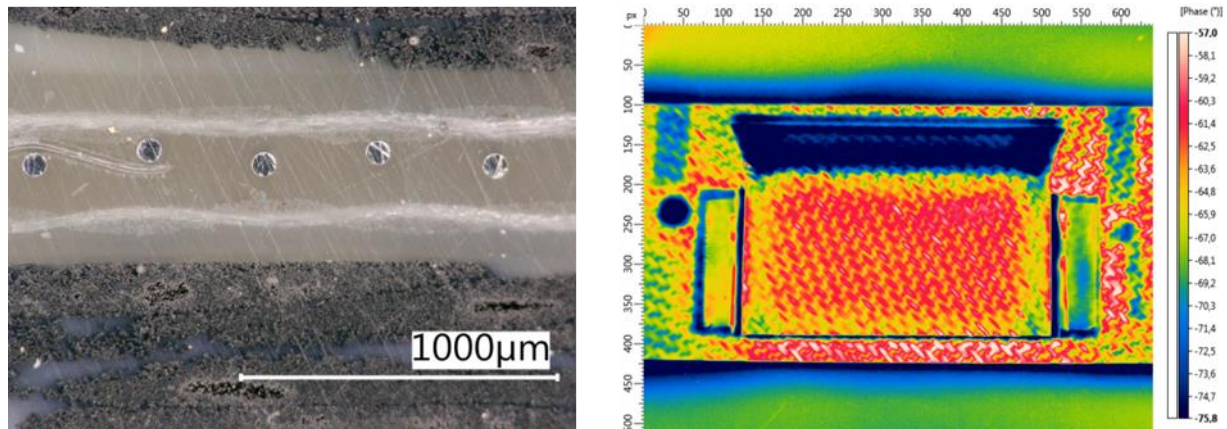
Microsection of the welding zone (left), thermogram of a welded clip (right)
